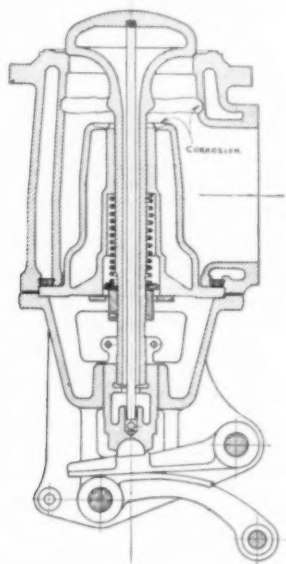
CORROSION OF VALVE CASING BY SULPHUR IN GAS
